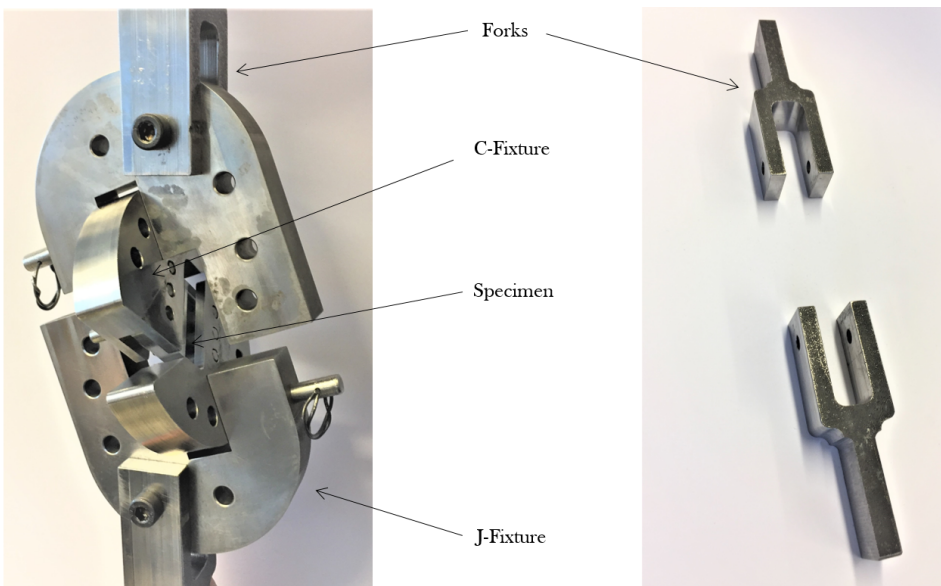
Left: Manufactured assembly, Right: Manufactured forks.
